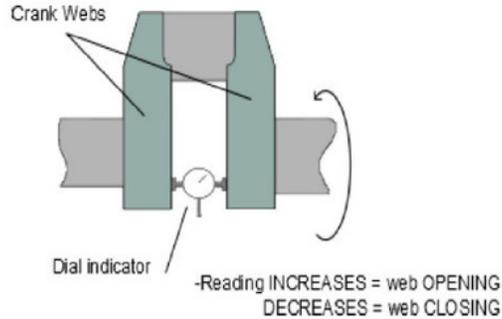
Dial Indicator to Check Crank Web Deflection [8-9]
